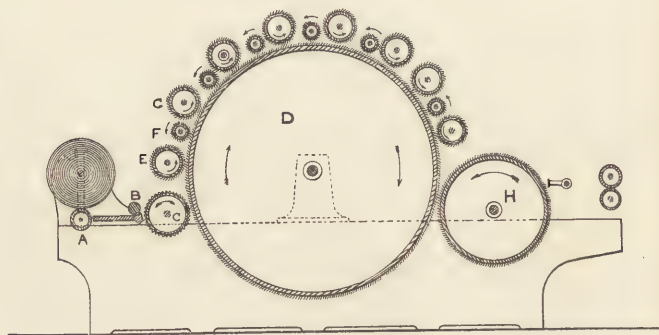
SECTION OF ROLLER AND CLEARER CARD.
